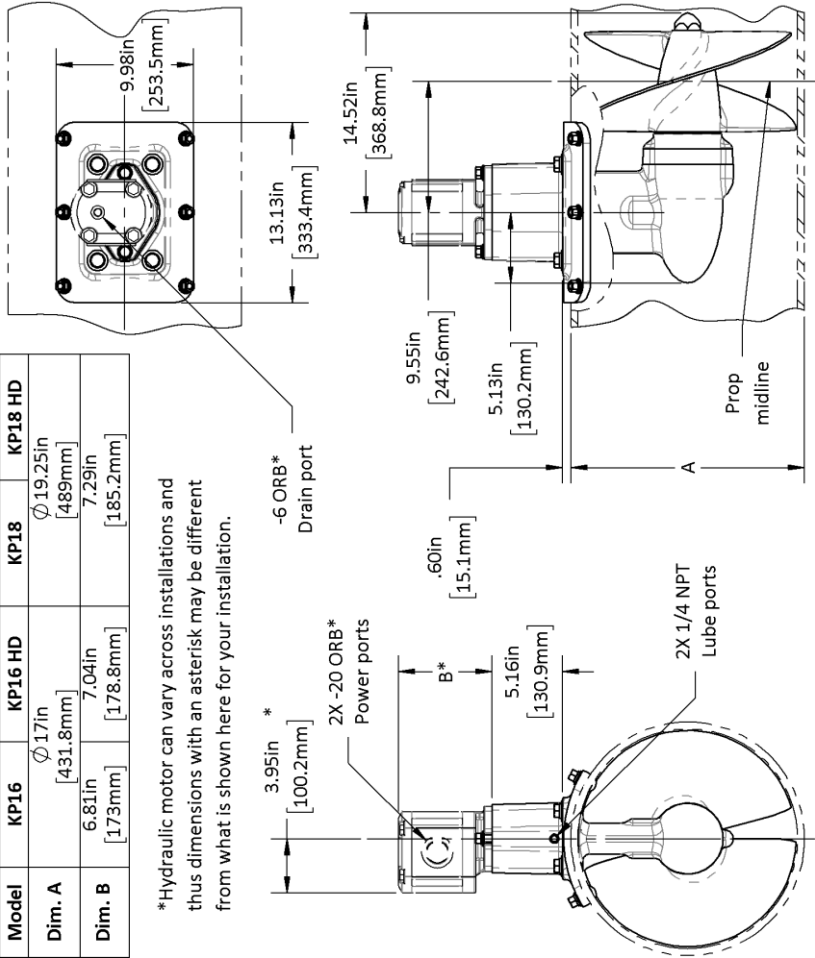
KP16 & KP18 tunnel thruster dimensions
